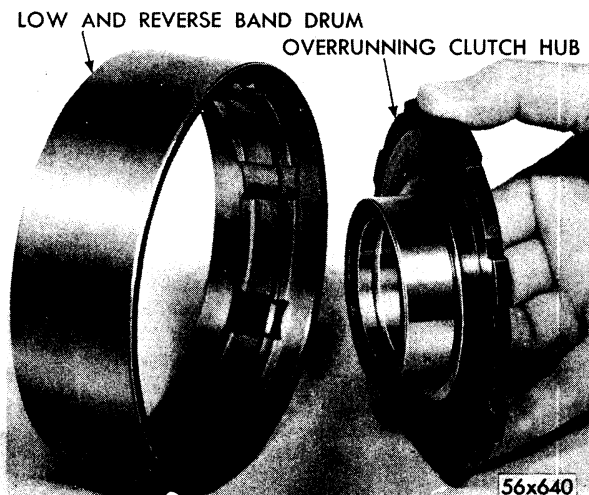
Removal and Installation of Overrunning Clutch Hub in Low and Reverse Band Drum
